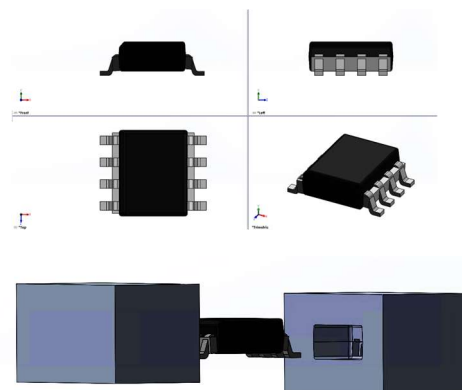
[top] TI semiconductor package (P82B715DRG4) insert, [bottom] TI chip insert with 2-part adaptor piece.
